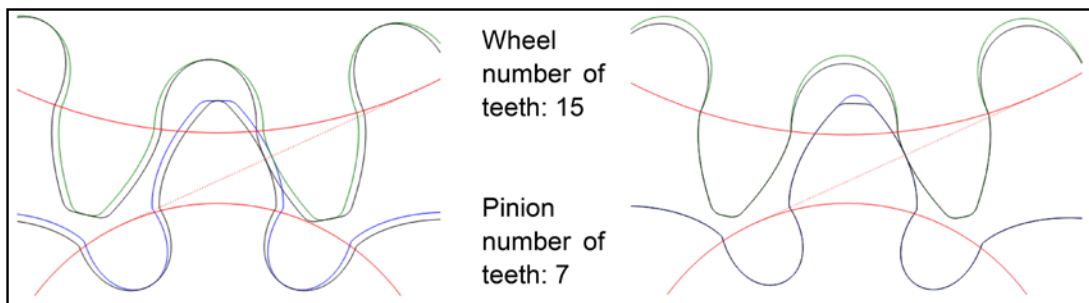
Left — complementary tooth-*ing*; right — pinion addendum and wheel dedendum increased.
